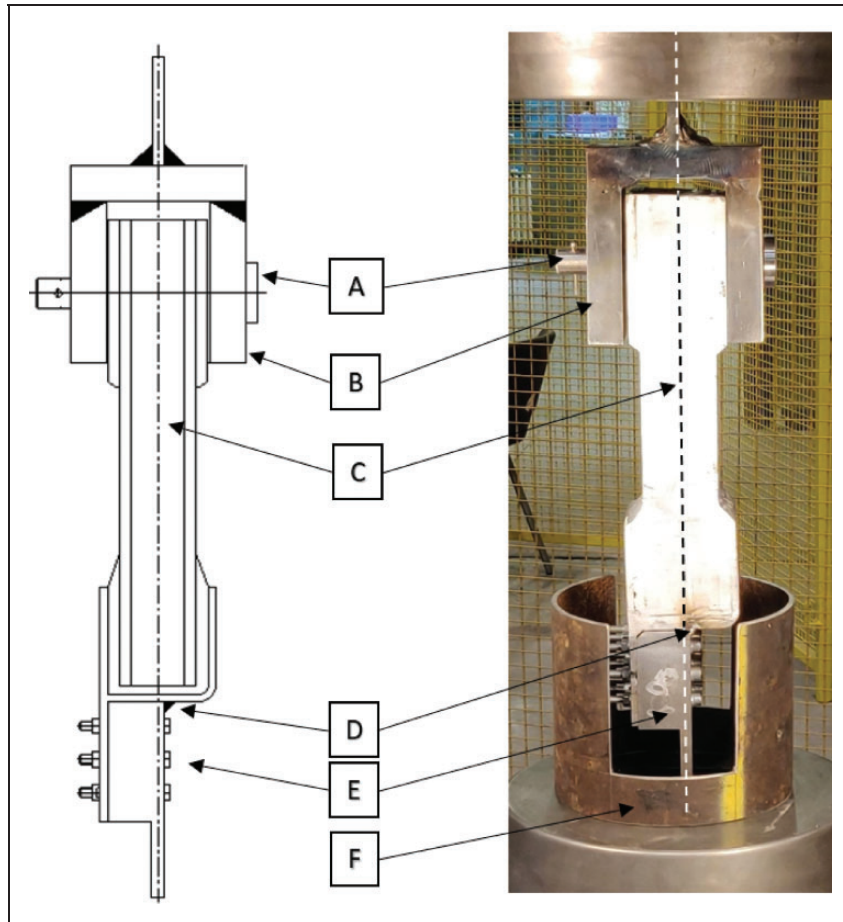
Schematic diagram and photograph of specimen and fixture mounted in the tensile test machine. (a-Knuckle pin, b-Double forked end, c-Alignment (centre) line, d-Fillet weld, e-Single forked end, f-Protective shield.).
